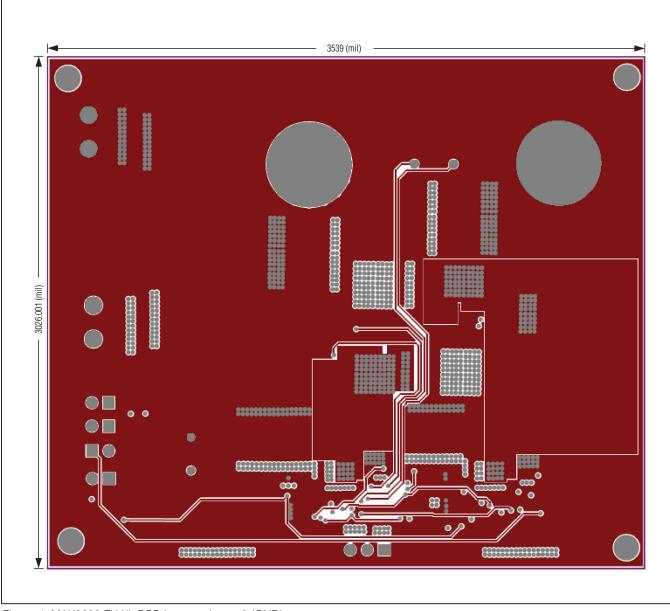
MAX8686 EV Kit PCB Layout—Layer 2 (GND)
